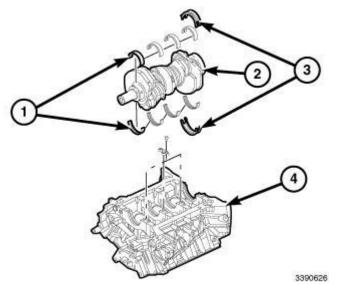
Crankshaft, Bearings, Thrust Bearing & Engine Block Courtesy of CHRYSLER GROUP, LLC
